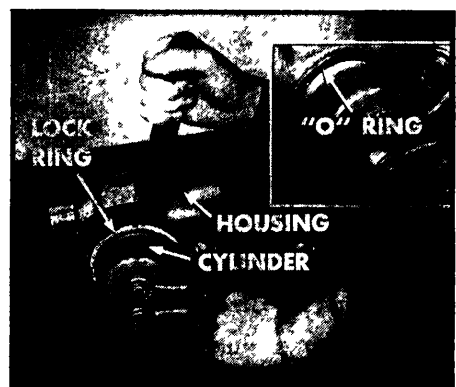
Correcting ill alignment between cylinder lock rings and housing by tightening lock rings with spanner wrench
